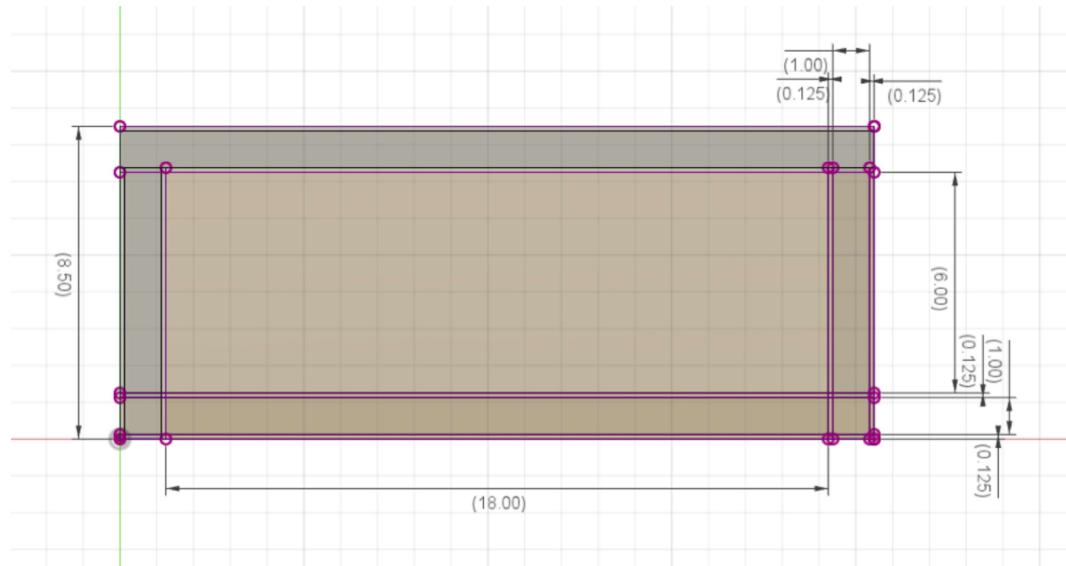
Front View Dimensions of Reflow Oven. (Units: Inches)
